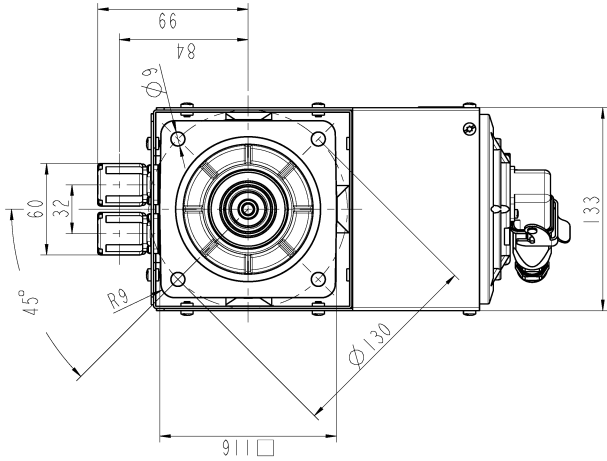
Dimension sheet MSK060 with axial fan unit
